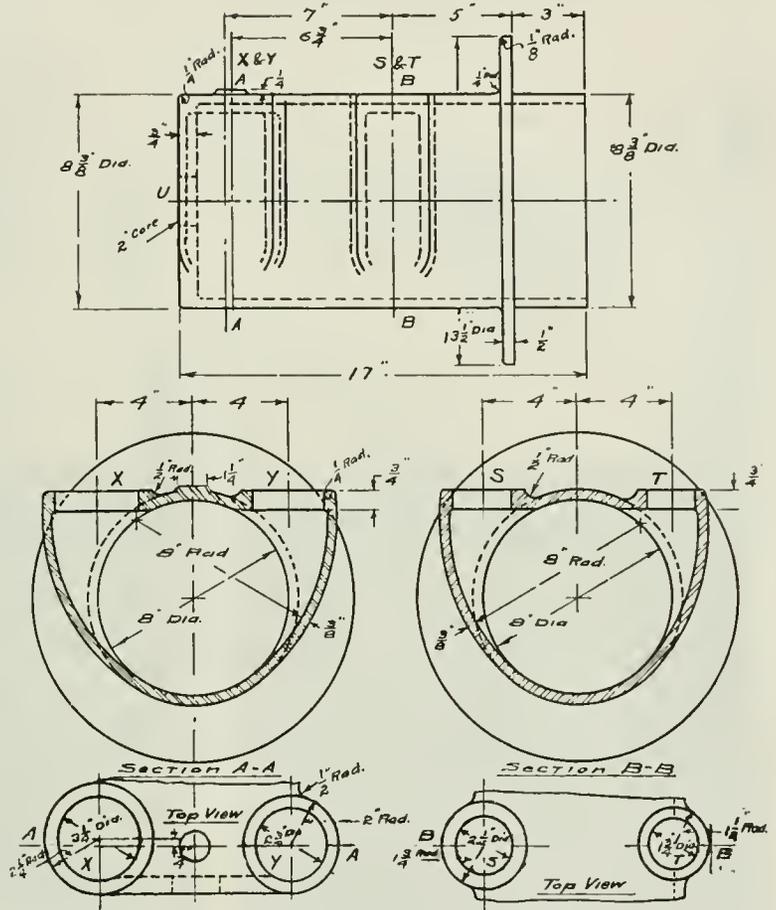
Elevation and Sectional Drawings of an 8-inch Powdered Coal Burner
